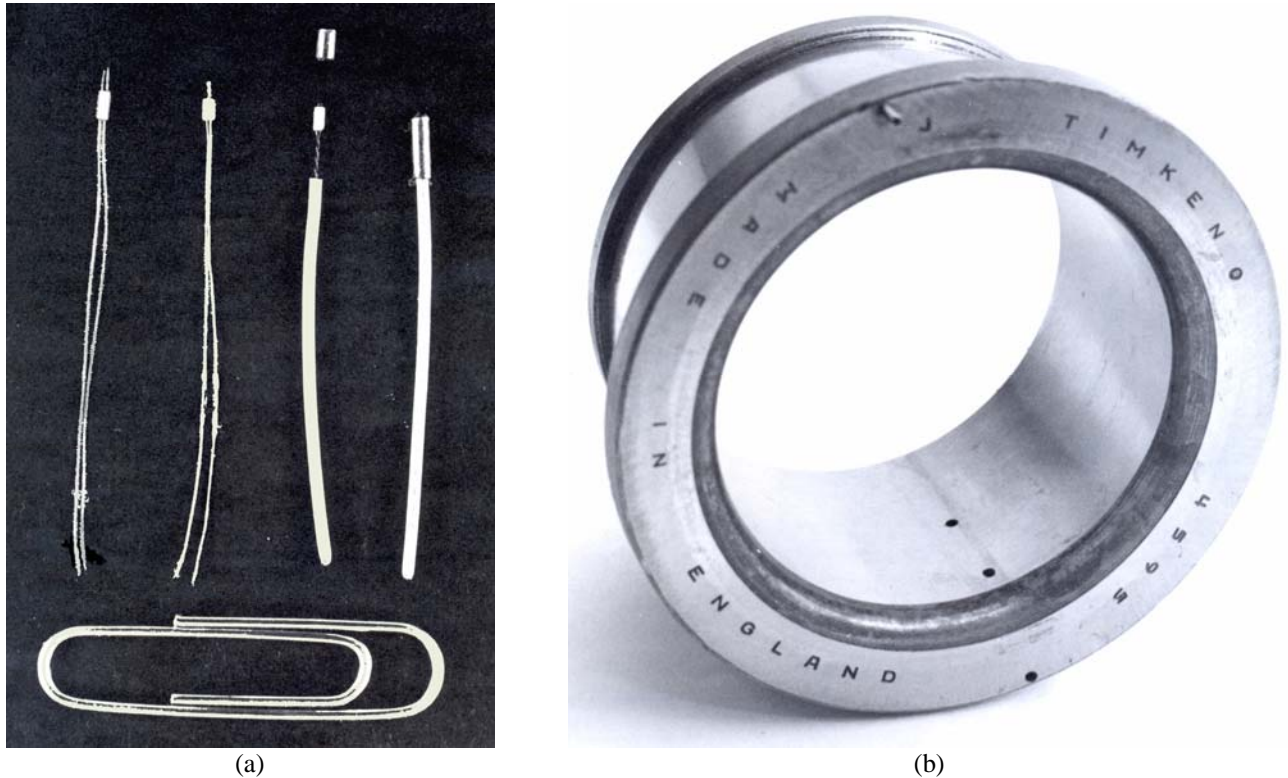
Thermocouple manufacturing sequence (a); inner ring with spark- eroded holes for thermocouples (b).
